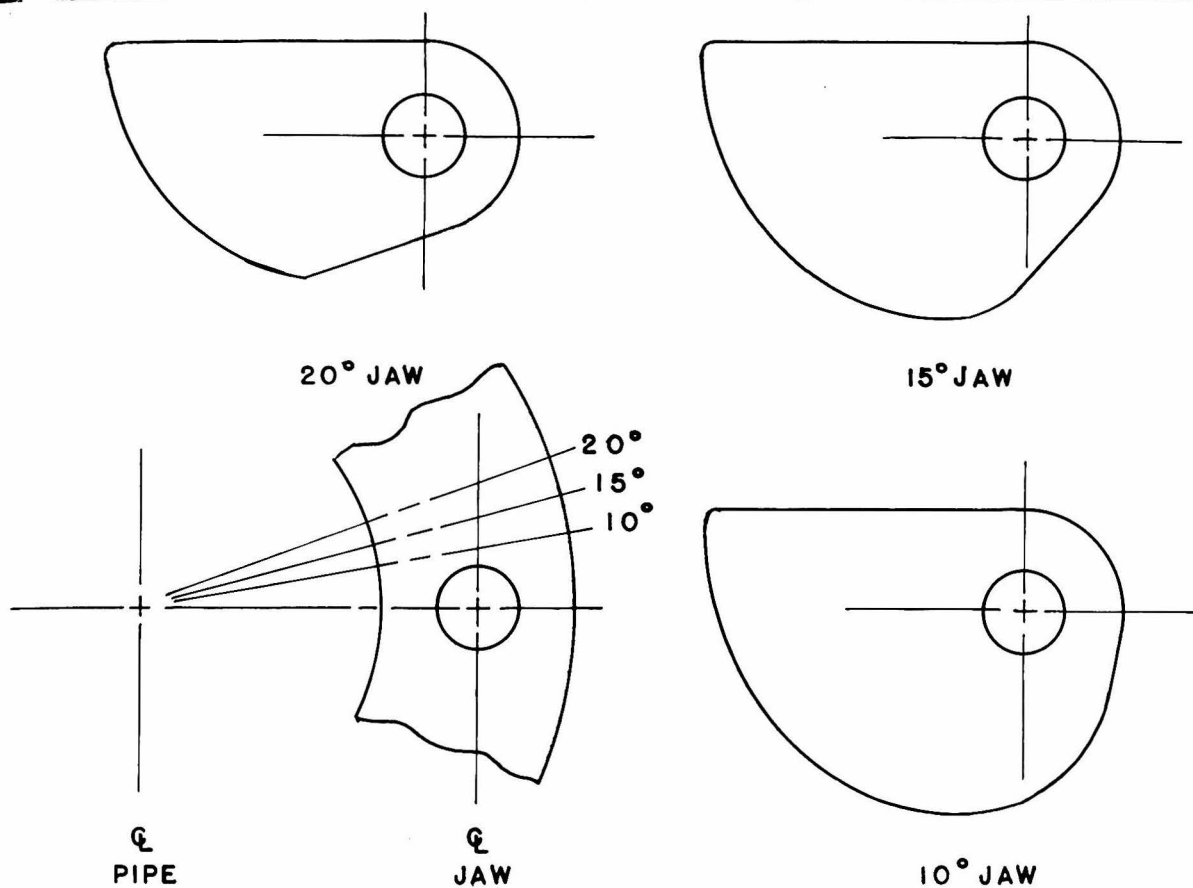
ROTATING-WEDGE CHUCK JAW PROFILES.
